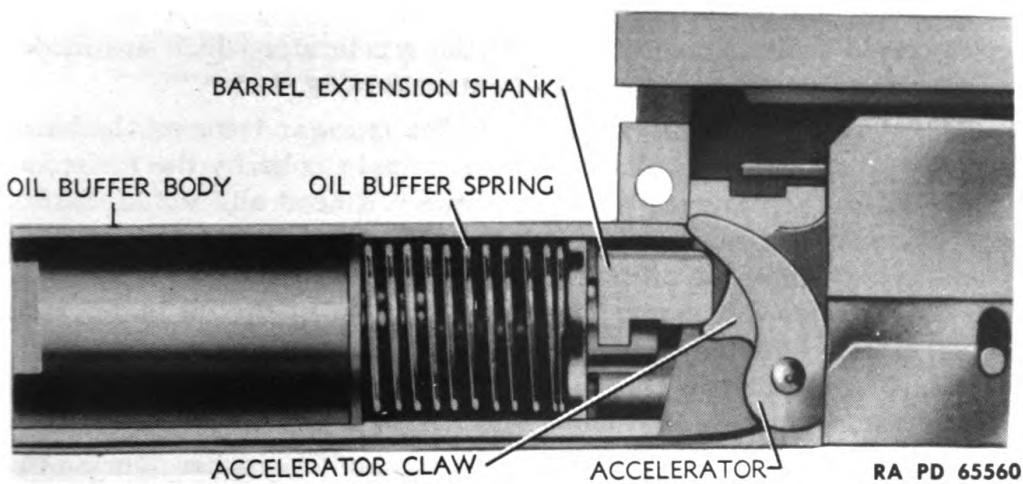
Oil Buffer Spring Compressed and Barrel Extension Locked Back by Accelerator
